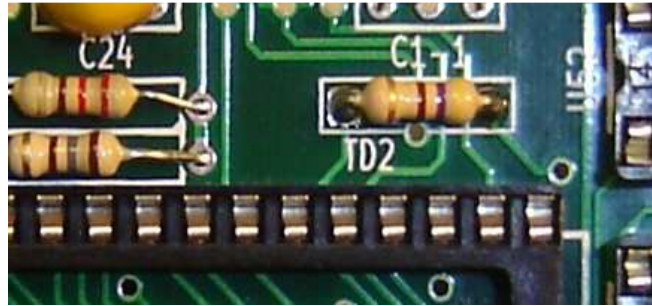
Insert the IC sockets, cover with a flat sheet of cardboard, flip 180 degrees, and then solder from above.
